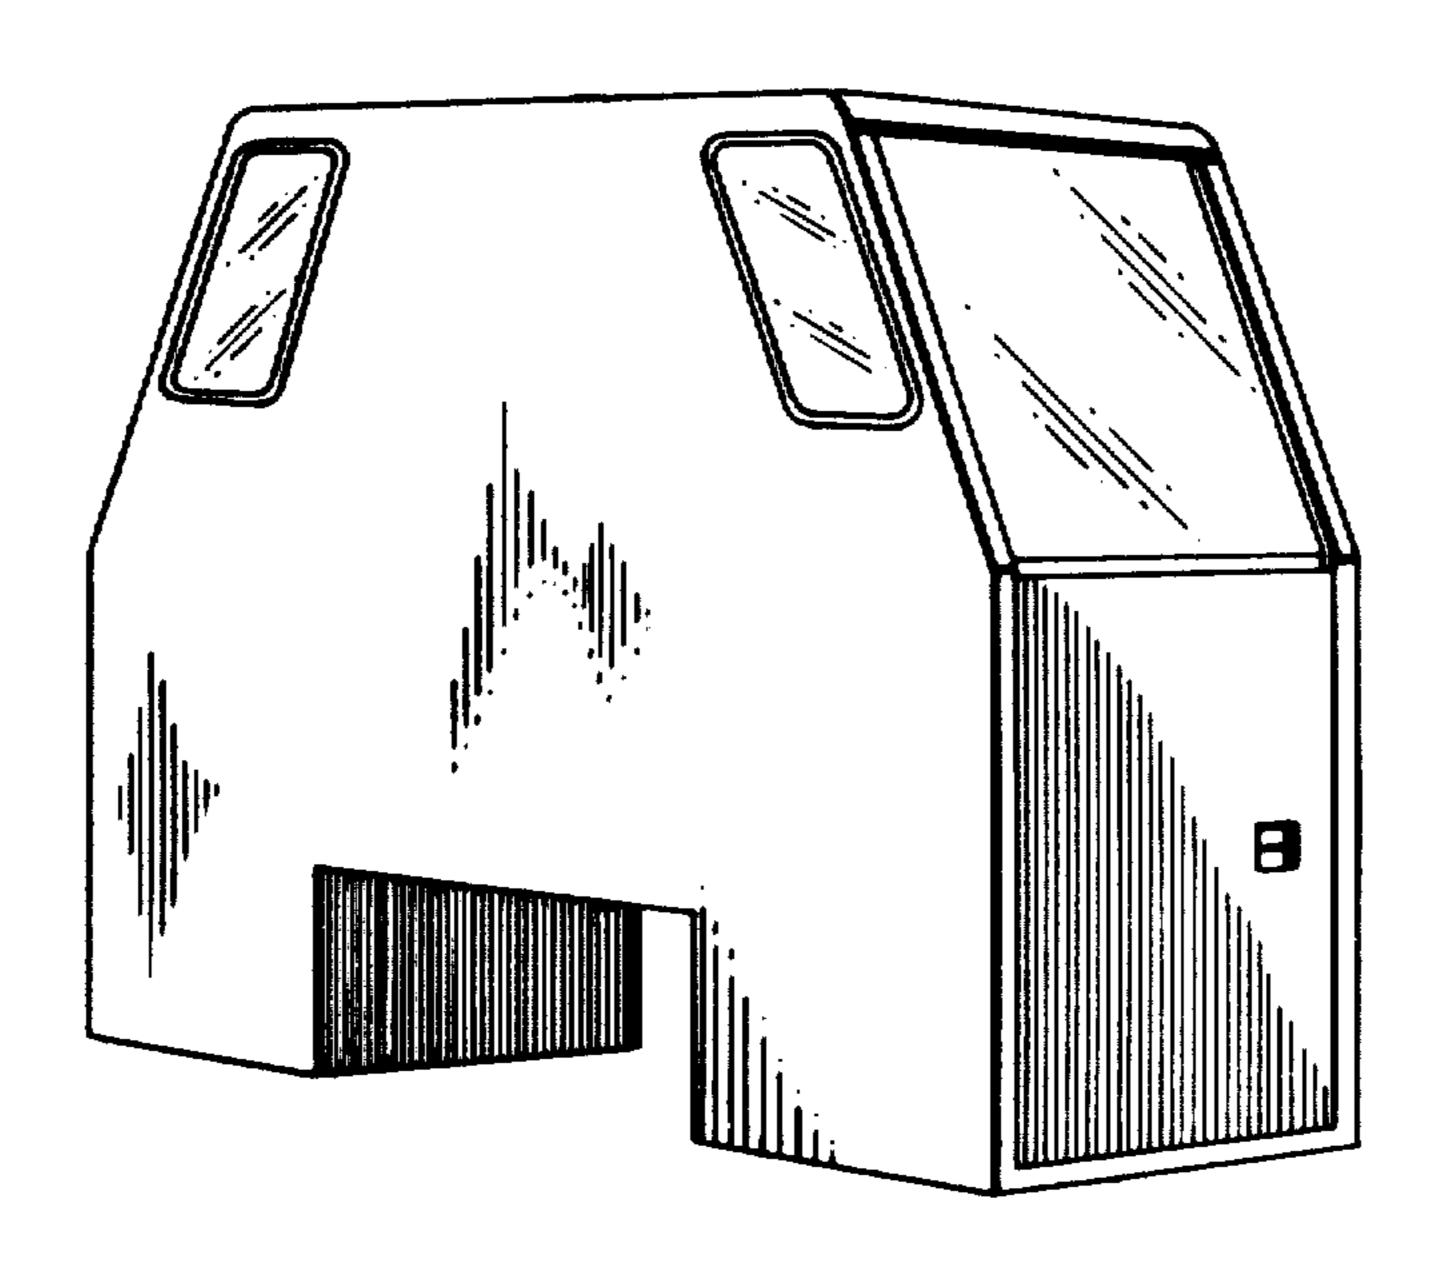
is a left rear perspective view thereof; FIG. 3 is a right front perspective view thereof;
